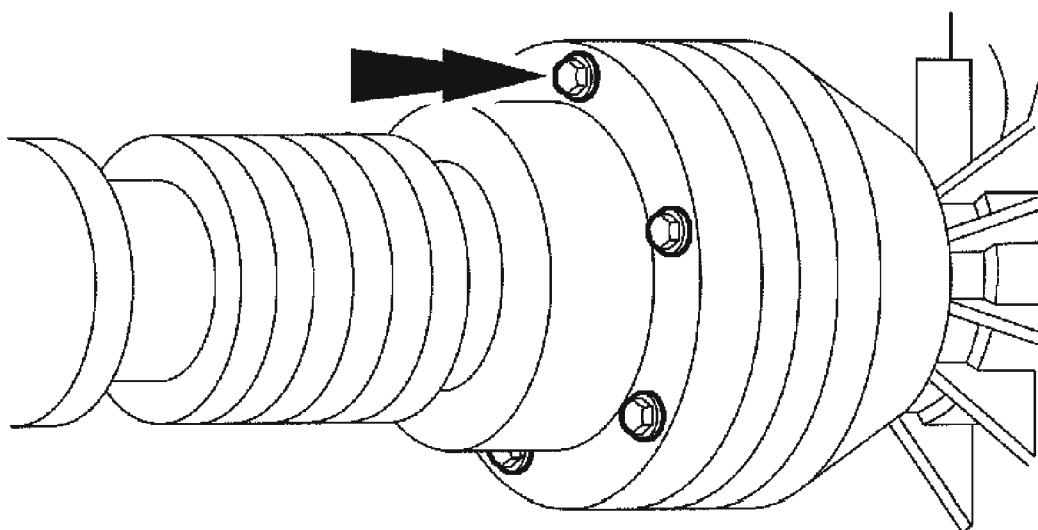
Disconnecting Front Exhaust Pipe Flange
